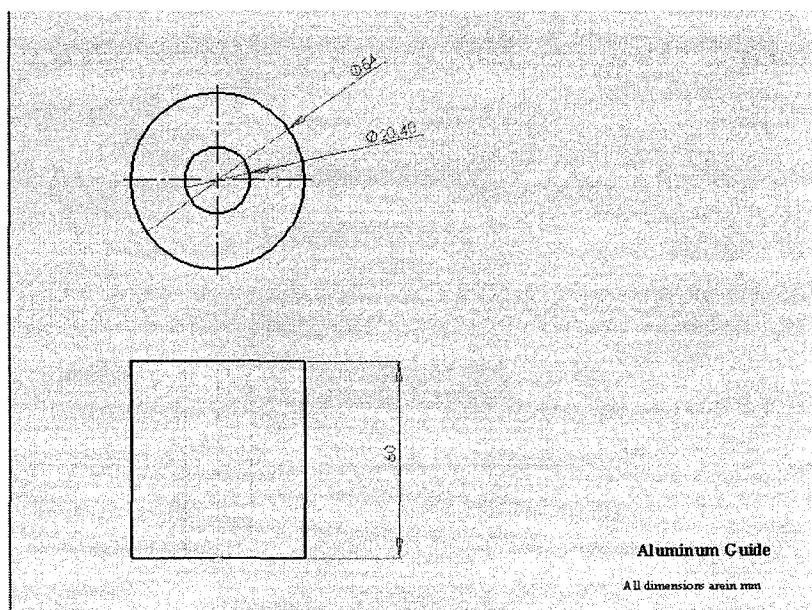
4 A mechanical drawings of the aluminum sleeve used for sliding the permanent magnet in to its place in the SS-410 cylinder.
